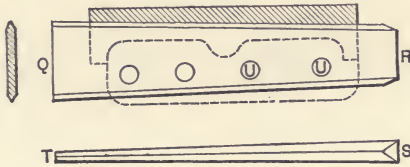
WEDGE FOR SPLITTING THE RIMS.
